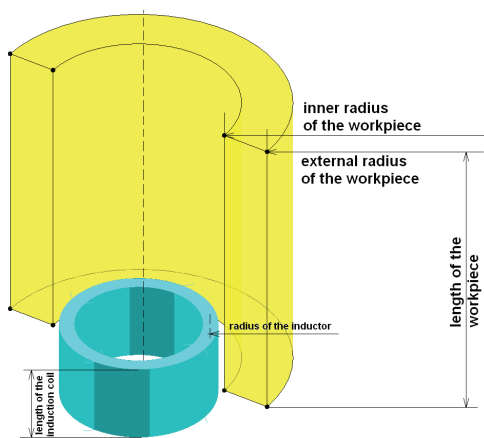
Geometrical model of a cylindrical workpiece with an internal inductor
